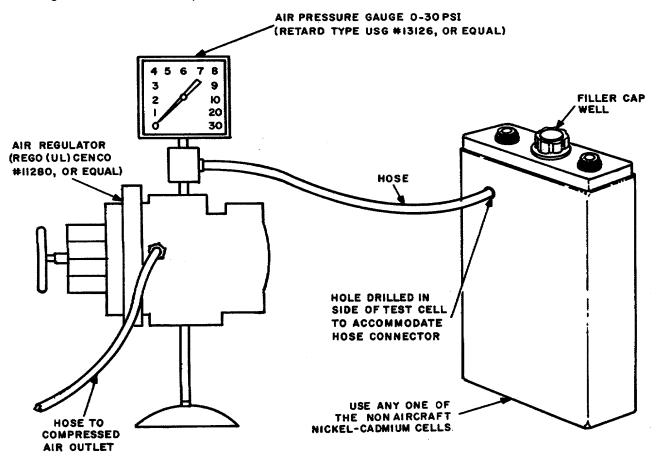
Fabrication Diagram for Fillercap Vent Valve Tester
